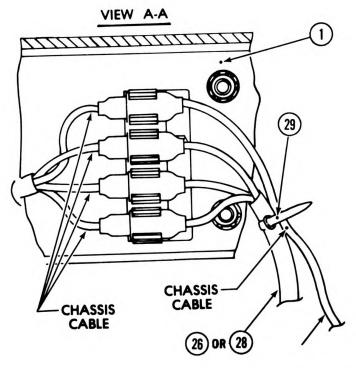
Trailer, Side, Top and Rear Views Sheet 3 of 3)
